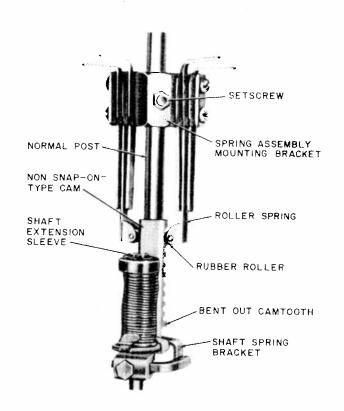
Normal Post Spring Assembly Having Rubber Rollers Operated by Nonsnap-On-Type Cam (single cam illustrated)
